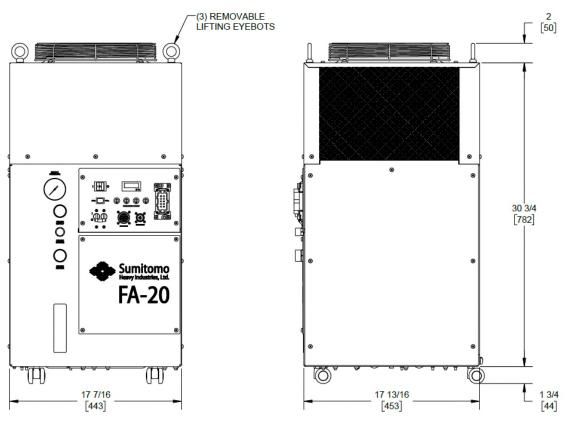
FA-20L Compressor, Dimensions Dimensions are in inches and [mm].
